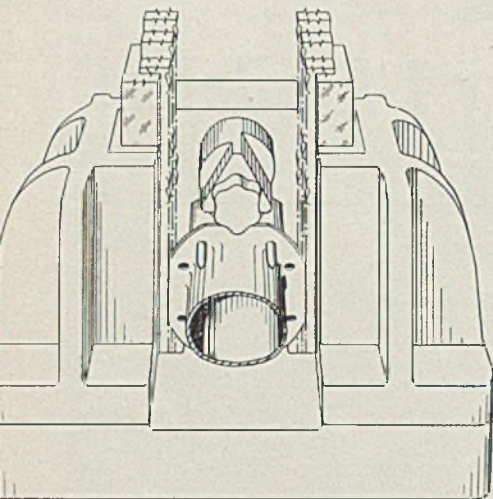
Sketch of fixture for broaching flats on flanges of airplane engine cylinders in three passes. Cylinder is located on pins passing through holes in flange. Advance for each pass is controlled by faced off portions of face cam mounted above cylinder. Operator rotates one-third turn for each advance
